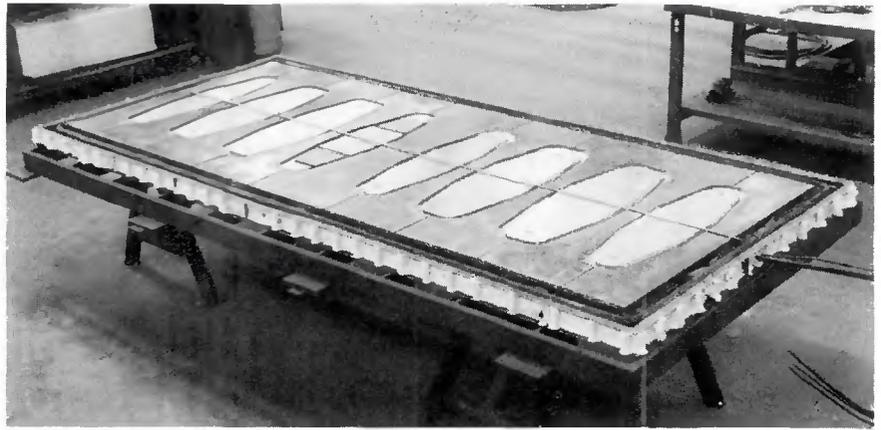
Braze assembly (4 × 10 ft) in open retort
